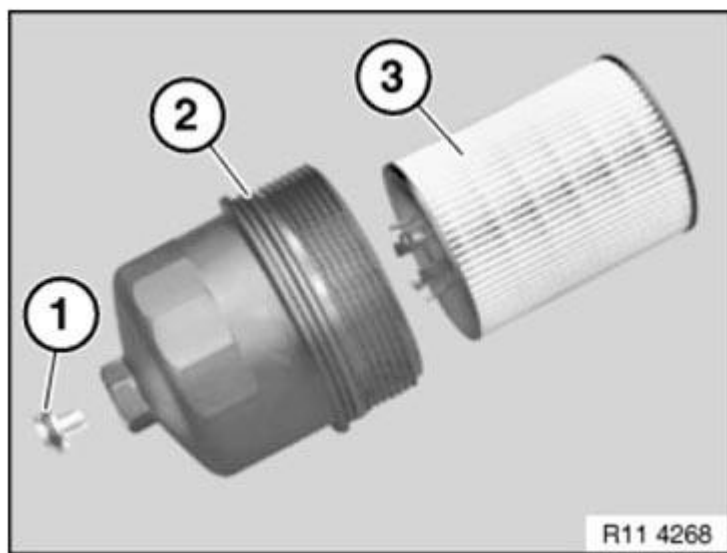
Identifying Sealing Ring And Oil Filter Element
